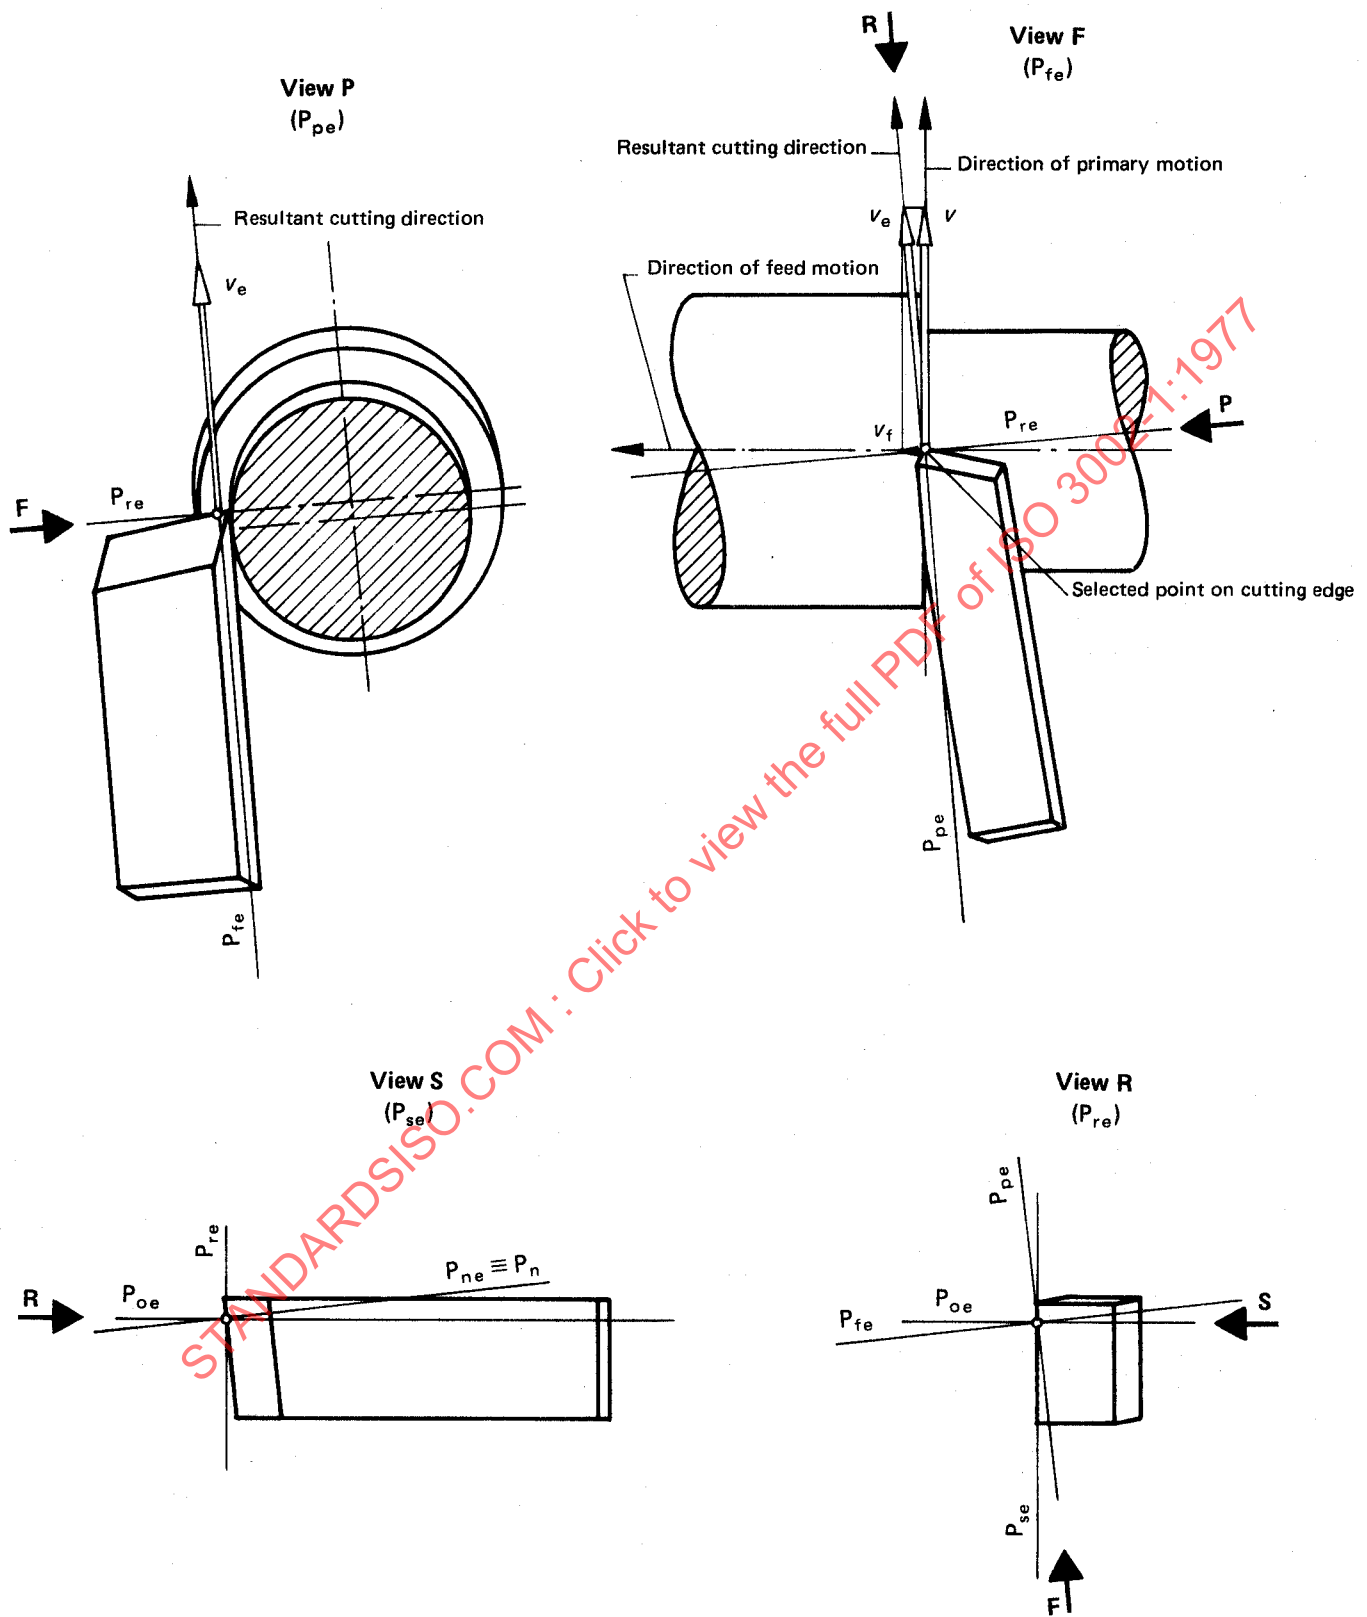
Planes in the tool-in-use system — Tangential turning tool
